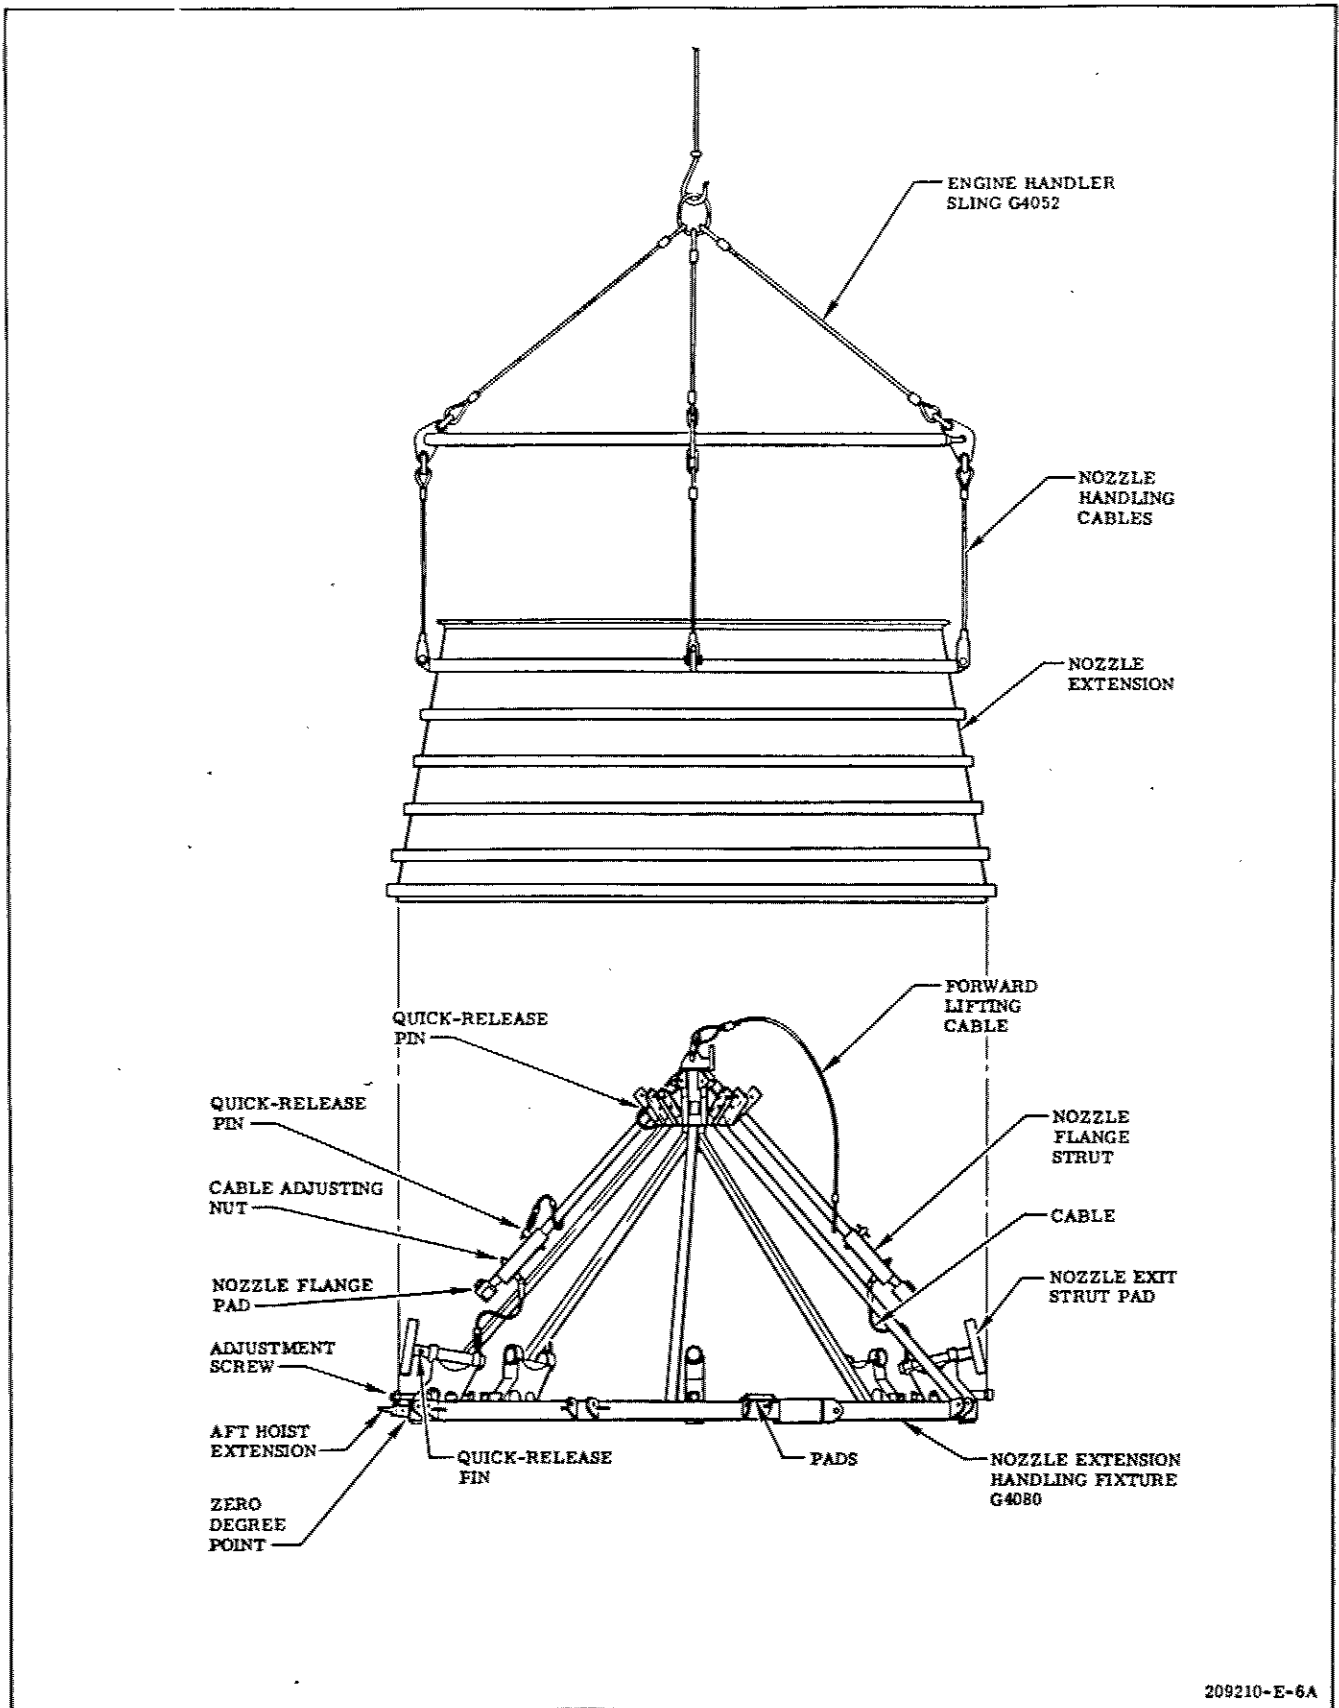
Installing Nozzle Extension on Nozzle Extension Handling Fixture
